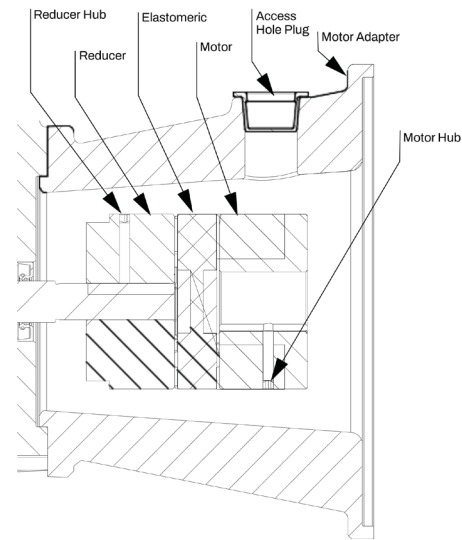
Closed Motor Adapter and 3-Piece Coupling Assembly (NEMA 56-NEMA 140, IEC 90-280S)
